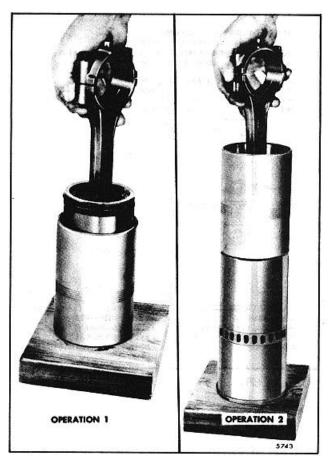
Installing Piston and Connecting Rod Assembly in Ring Compressor and Cylinder Liner
